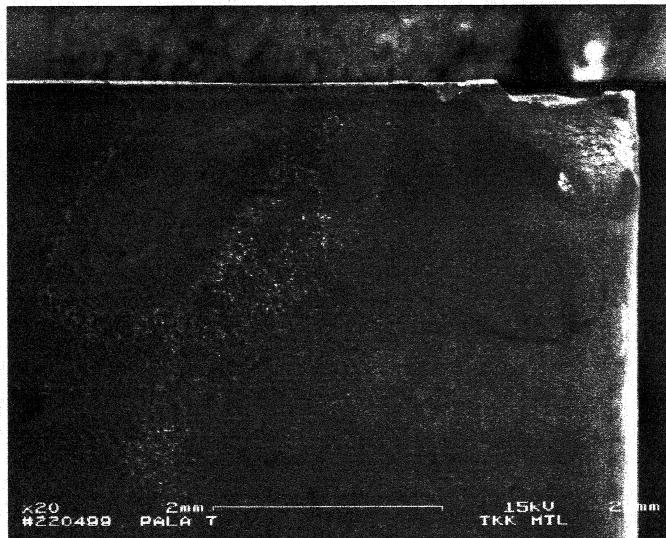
The flank edge of solid carbide insert after machining time, $T = 4$ min in turning of X5 CrMn 18 18 trial material, 0.91 wt.% N. Cutting speed, $v_c = 65$ m/min.
